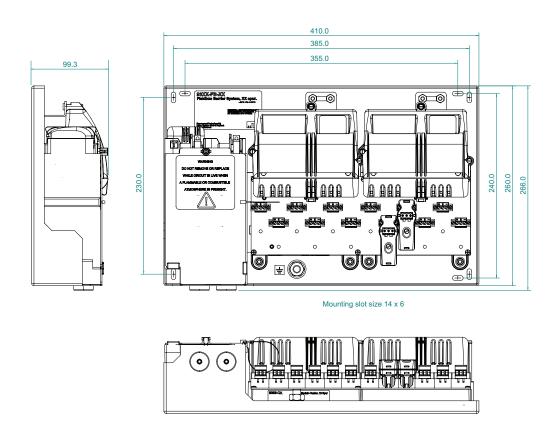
Dimensions and mounting hole positions for the 6-way baseplate assembly (9387-FB-Px)
